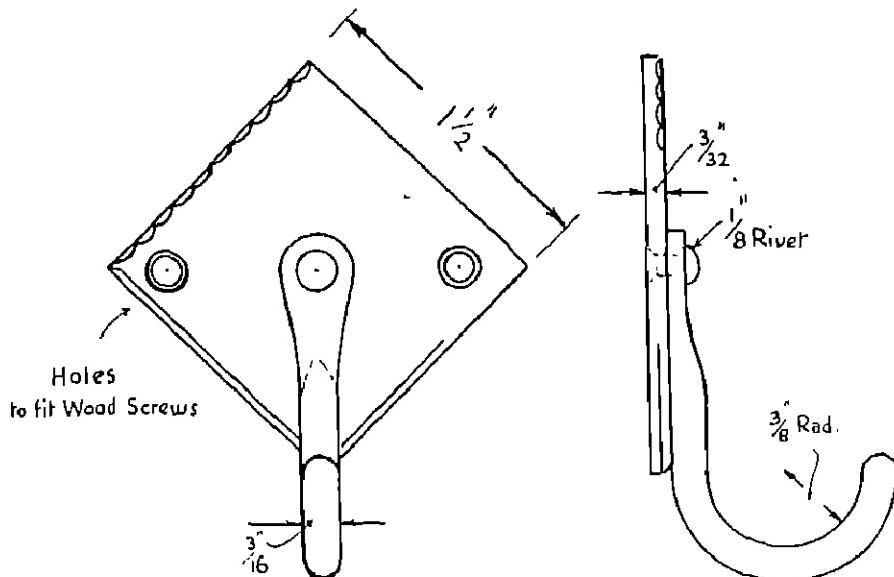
WORKING DRAWING OF A COAT HOOK (ALTERNATIVE PATTERN)
